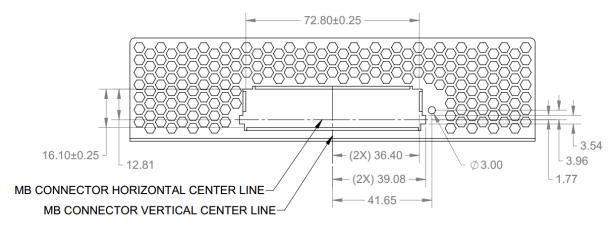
Small Form Factor Baseboard Chassis to Card Thumb Screw CTF Dimensions (Side View)
